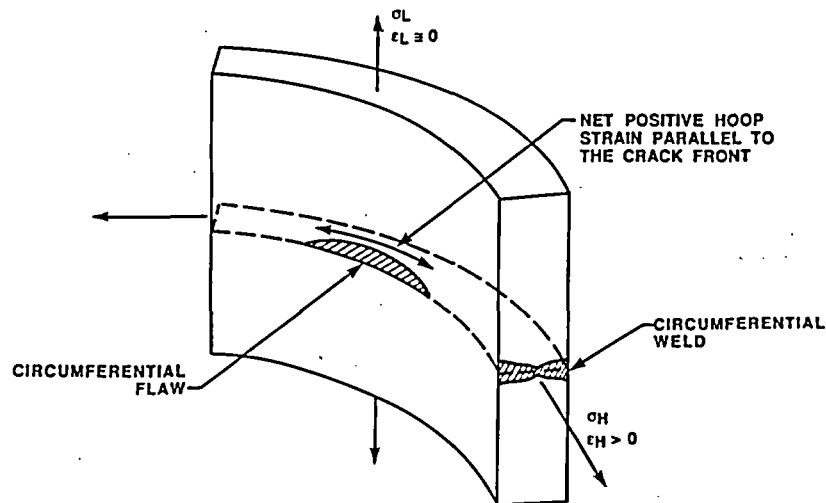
Configuration of a circumferential flaw in the weld of a ring-forged reactor vessel showing positive tensile hoop strains parallel to the crack front.
